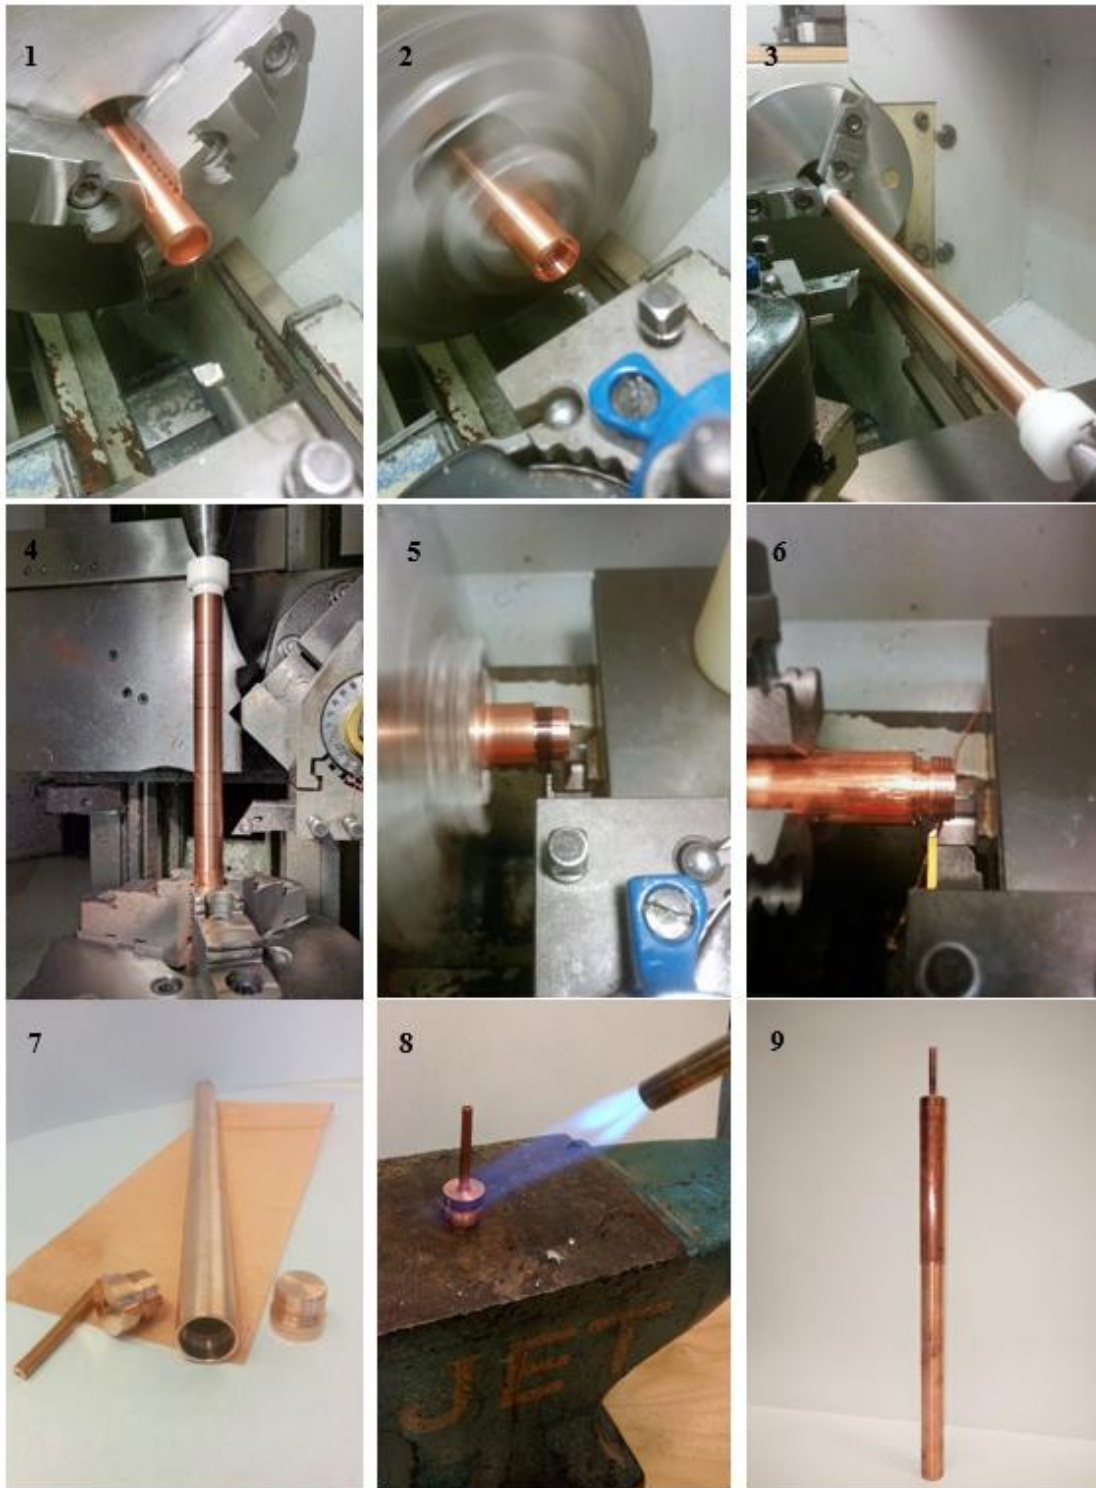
PROCESS OF MACHINING THE COPPER HEAT PIPES. 1. BORING THE SHELL. 2. BARBING THE SHELL. 3. TURNING DOWN THE OUTER DIAMETER OF THE EVAPORATOR AND ADIABATIC SECTIONS. 4. ADDING GROOVE FOR THERMOCOUPLE LOCATIONS. 5. ADDING THE O-RING GROOVE TO THE END CAP. 6. ADDING BARBS TO THE END CAP. 7. COMPLETED HEAT PIPE COMPONENTS. 8. SOLDERING THE FILL TUBE INTO THE END CAP. 9. ASSEMBLED HEAT PIPE.
